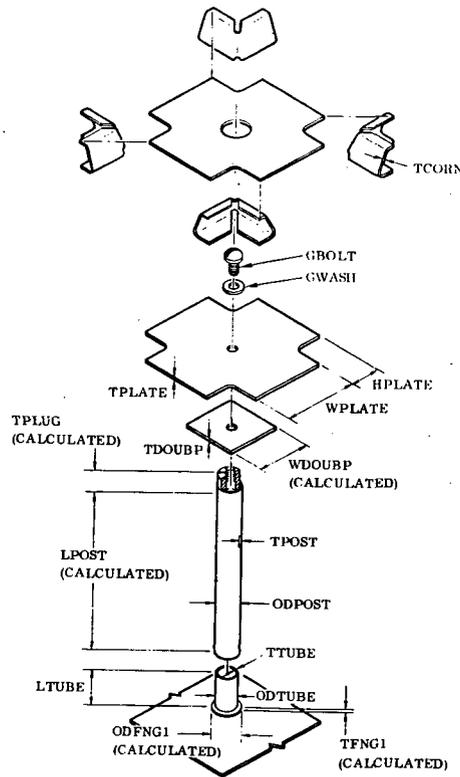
Cruciform and Support Post Assembly (Concept A)
